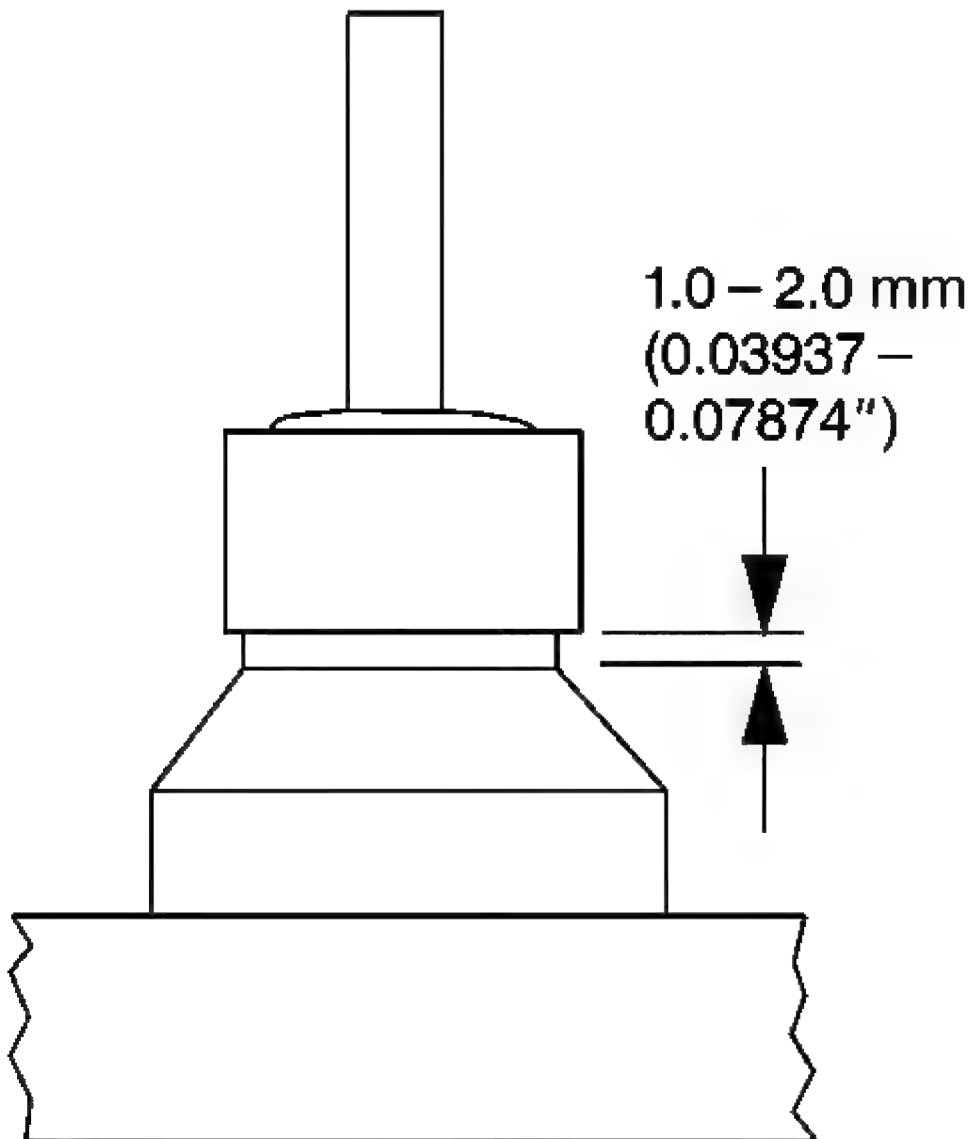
Identifying Gap Between Bottom Edge Of Valve Stem Oil Seal & Valve Guide
